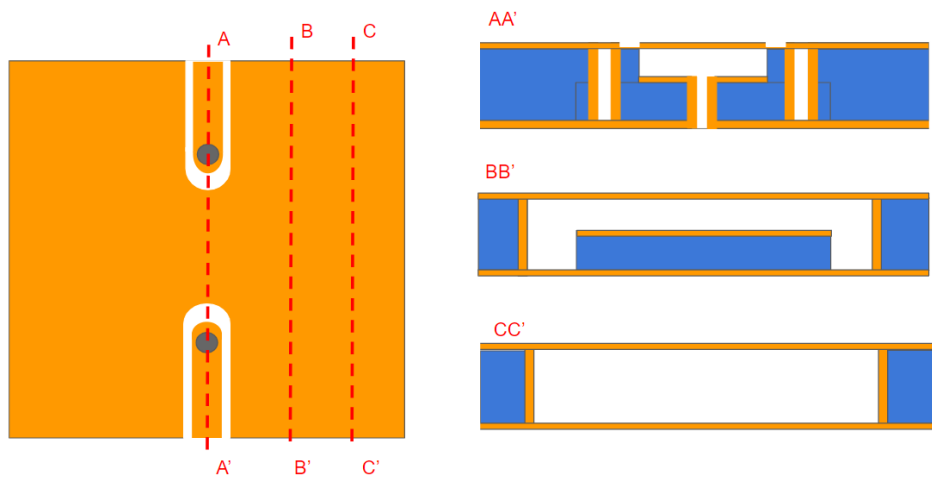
Top and side view after manufacturing steps 5,6,7 and 8 at different cuts.
